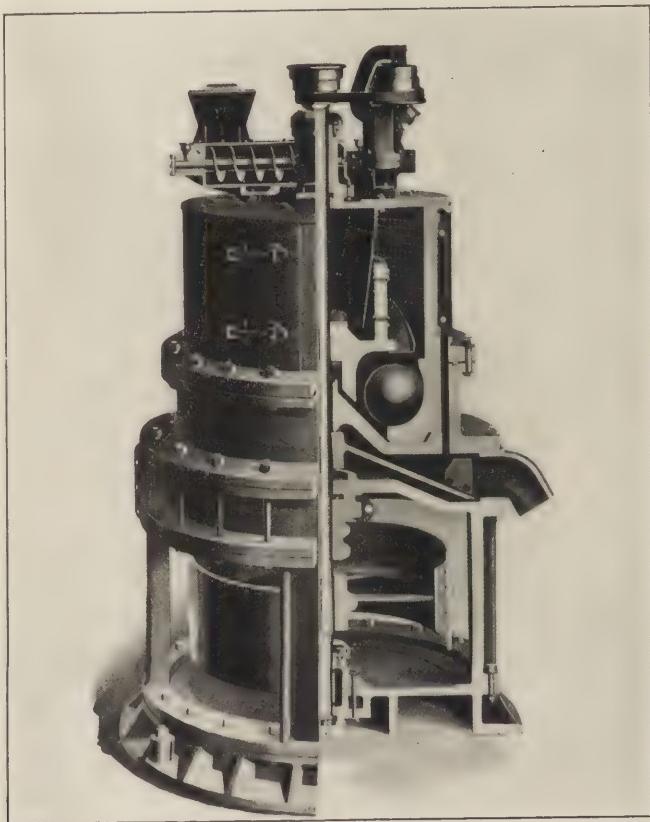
42" Fuller mill, fan discharge type—pulley driven.
